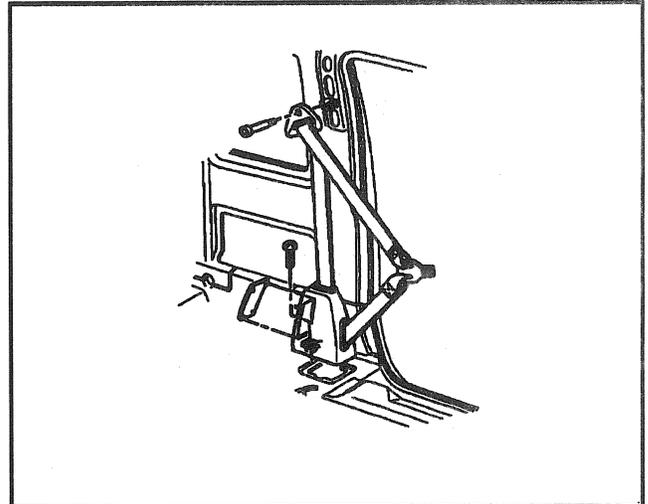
Front Lap Belt Seat Assembly with Split Front Bench (Regular Cab)
